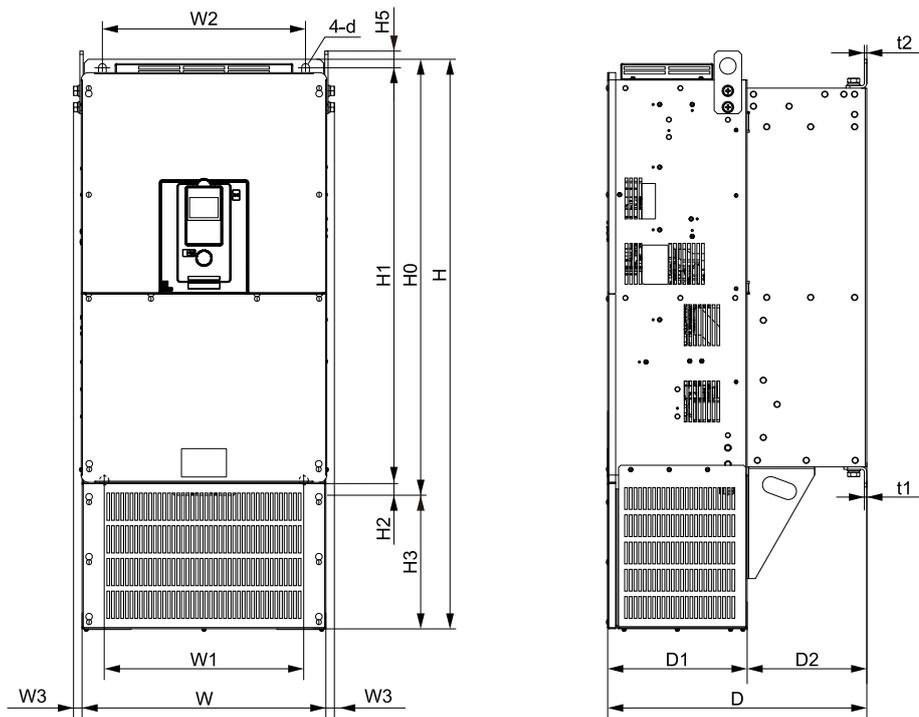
Exterior and Mounting Dimensions Diagram 8
